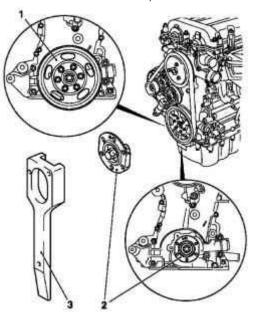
Removing the belt pulley crankshaft: 1 - belt pulley, 2 - wheel hub bolt crankshaft, 3 - special tool
